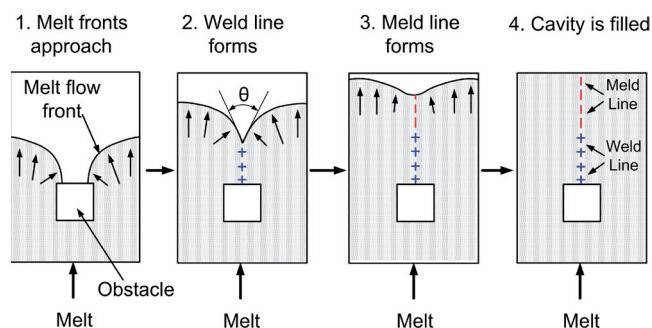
Weld and meld lines formed behind the obstacle [6]
